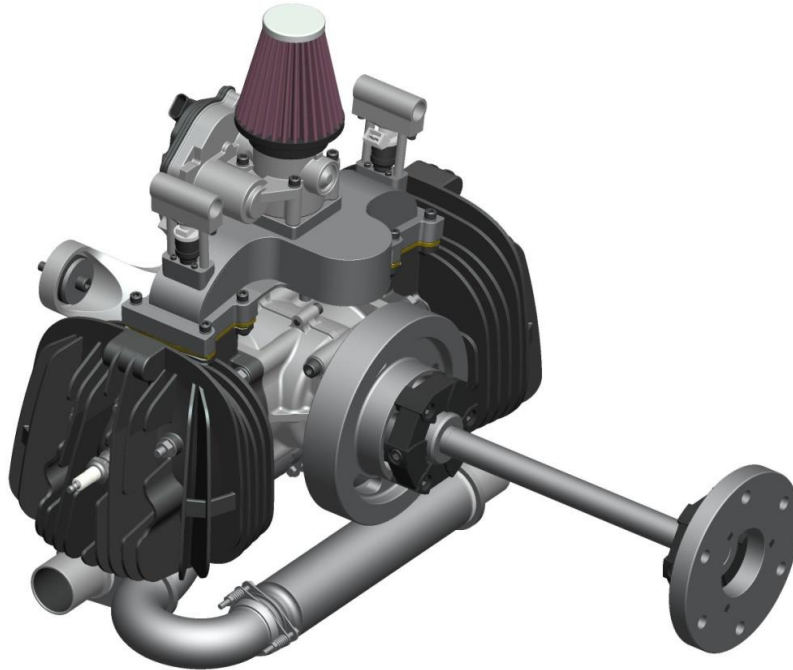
UAV ENGINE WITH FLYWHEEL AND DRIVESHAFT ASSEMBLY ATTACHED.
